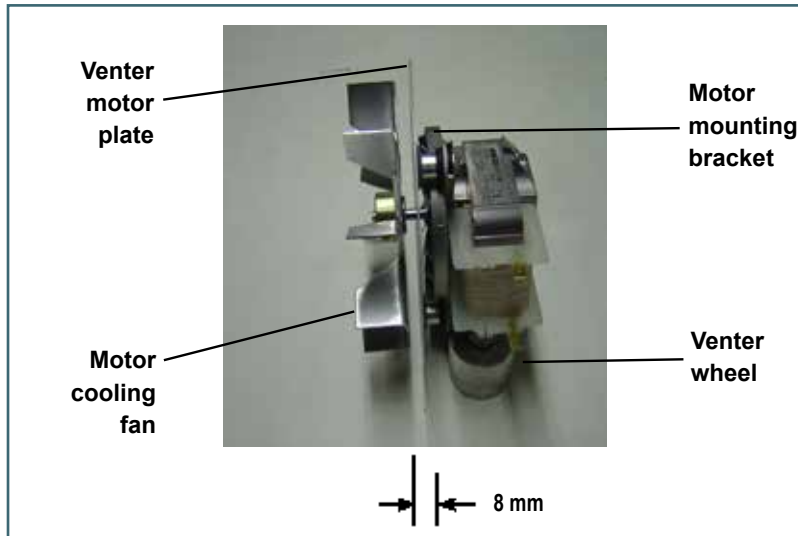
UDSBD-4E models 025 through 030 (rotation clockwise from motor shaft end)
